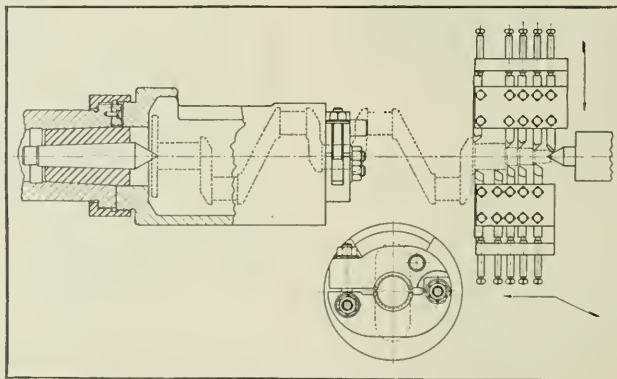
Tool Set-up in which the Spindle Fixture used in Fig. 12 is also employed
